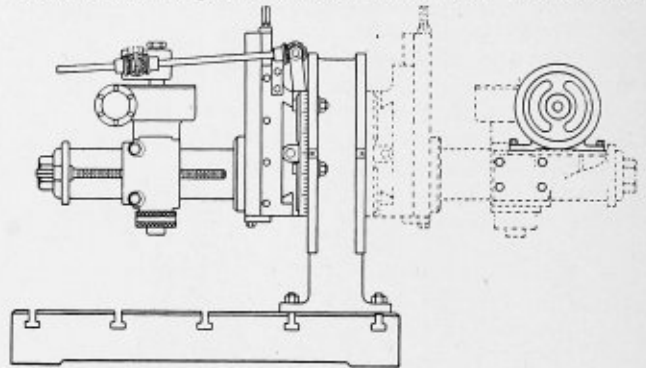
Side View of Machine Showing Adaptation of Slide Rest to Either Side or Back
